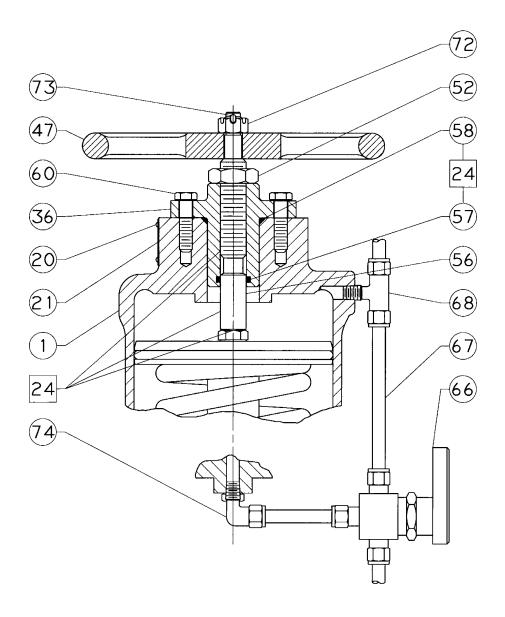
Fisher 585CR Size 25 and 50 Actuators Handwheel Assembly (spring extends actuator rod) 35 42 48 70 (60)65 45 47 0 (36)(46) 24 24 50 58 (64)(39) 24 (63)40 5) 38 20 24 (68) (2I) 24 (56 24 67 (74)24 (66) HANDWHEEL ASSEMBLY
